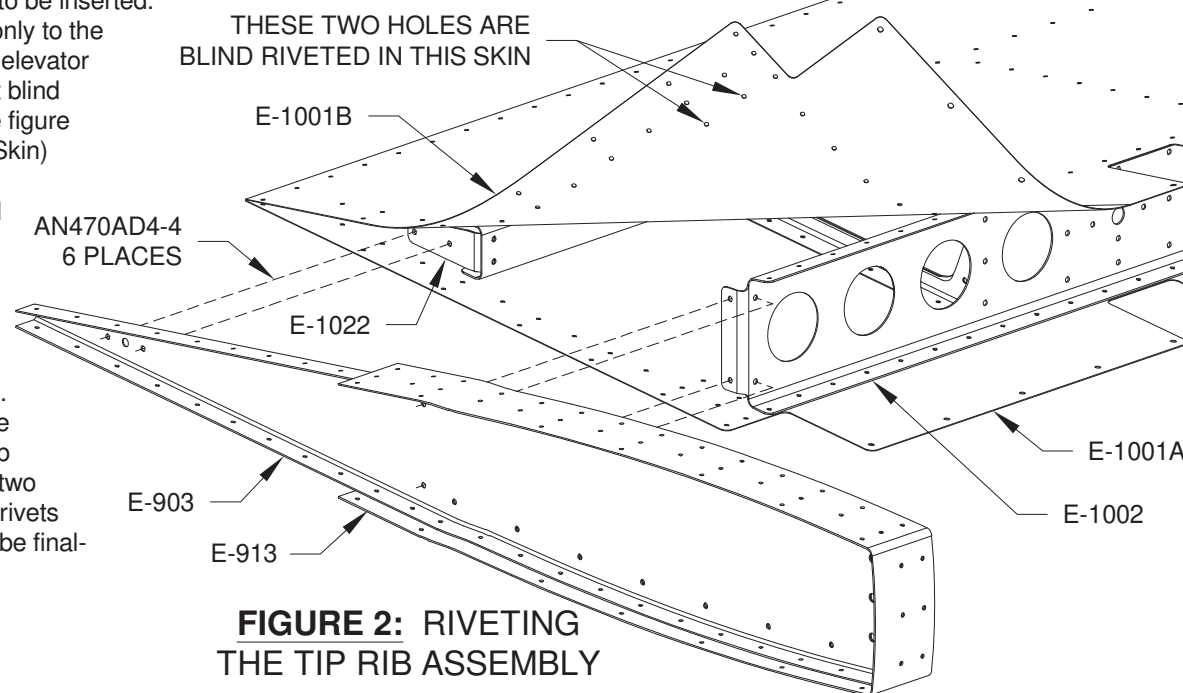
RIVETING THE TIP RIB ASSEMBLY
